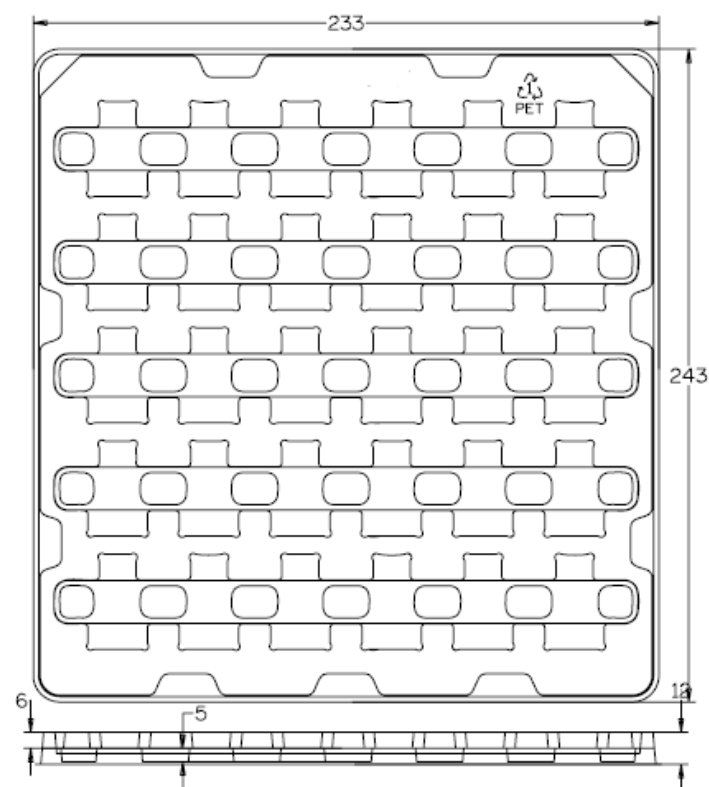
Package ray dimension for S5000 LXSx-PWxx-004I.
